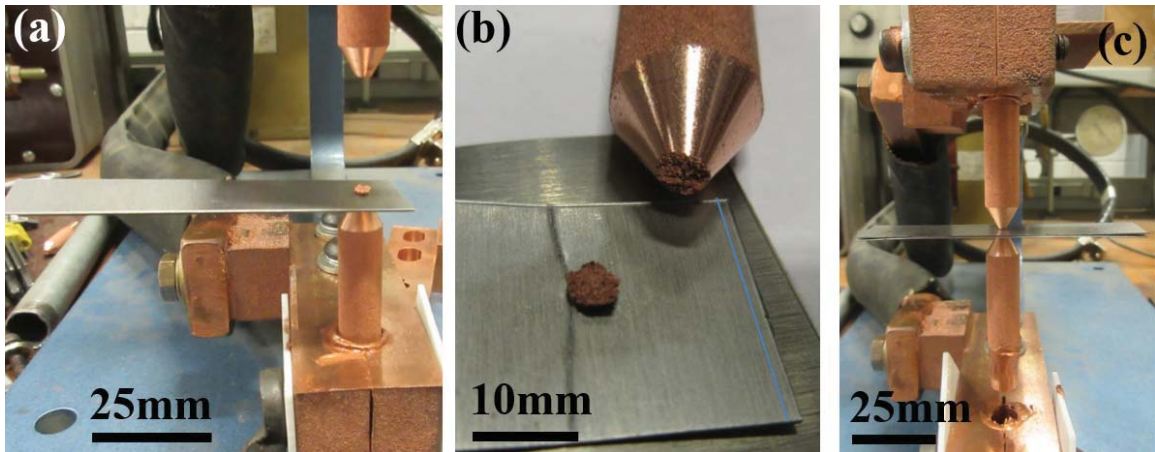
Damaged Electrode; (a) Bonded to Workpieces, (b) Closeup of Damaged Upper Electrode, and (c) Pulled Lower Electrode Out of Holder
